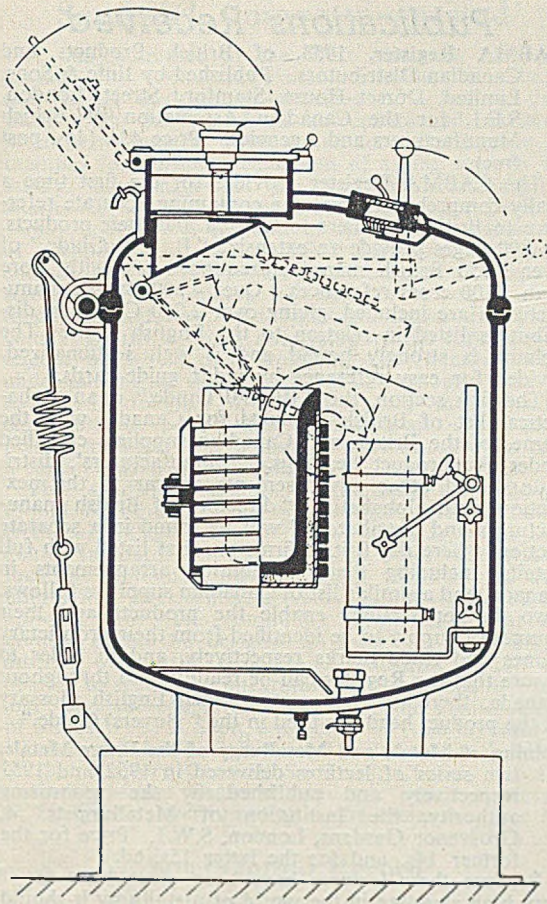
Sectional View of the Vacuum-melting Plant.
